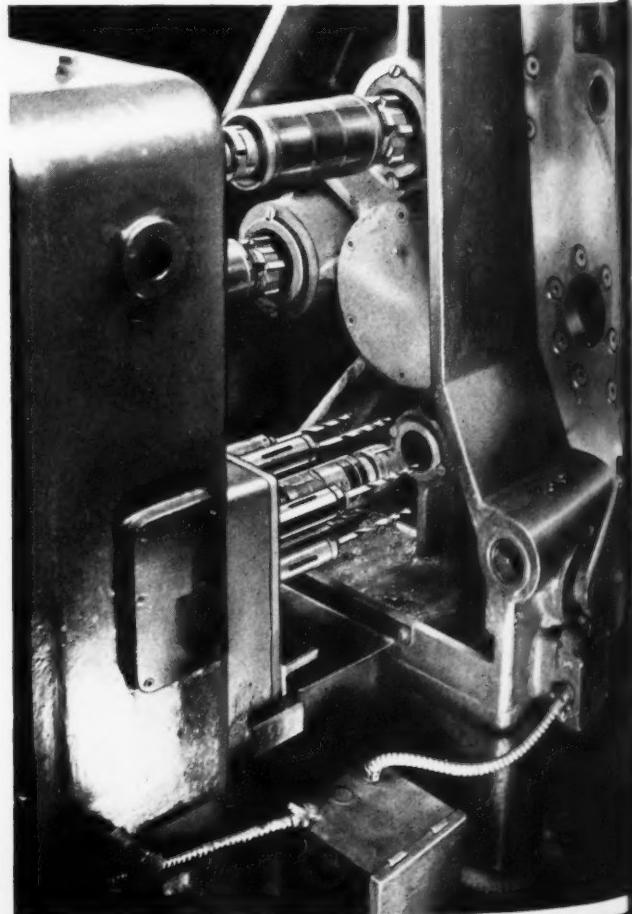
Tools Provided on the Left-hand End of an Opposed-head Machine of the Indexing Type
